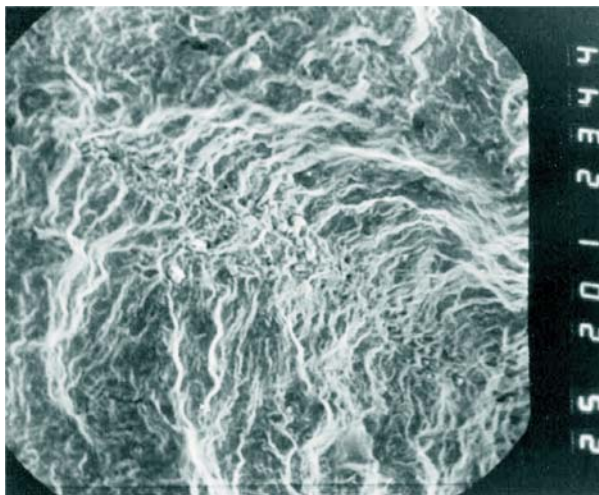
Secondary initiation cracks at large cluster of granular inclusions, specimen No. K10 cut from the crankshaft
